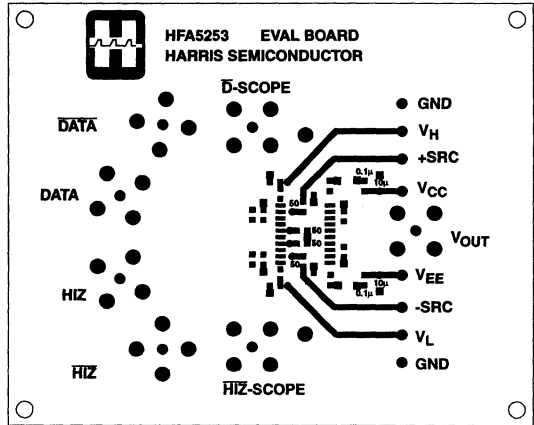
1X PC BOARD LAYOUT (TOP VIEW)
